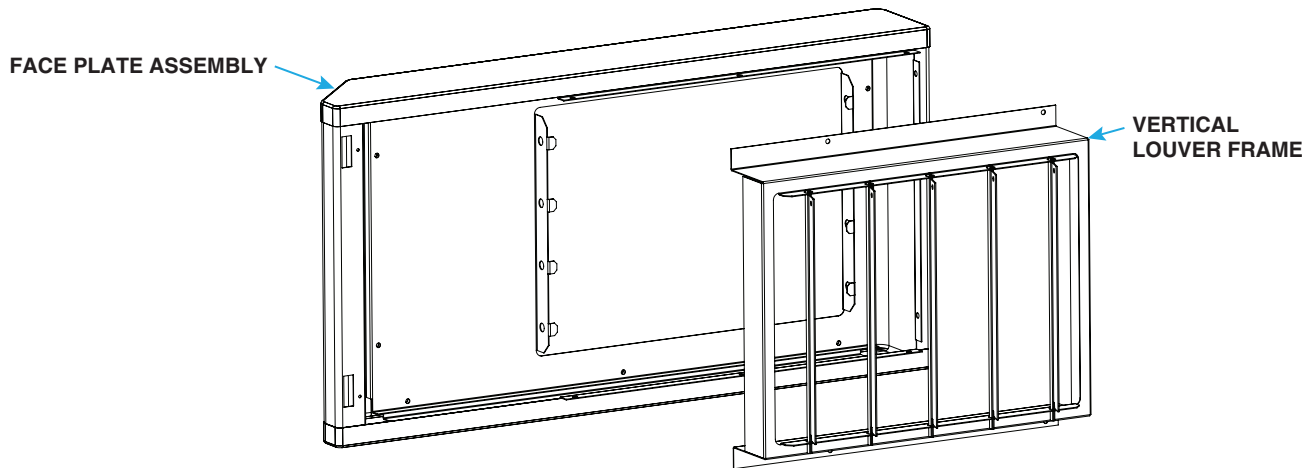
Typical Gas-Fired Unit Heater Face Plate Assembly (with Vertical Louver Frame Shown)
